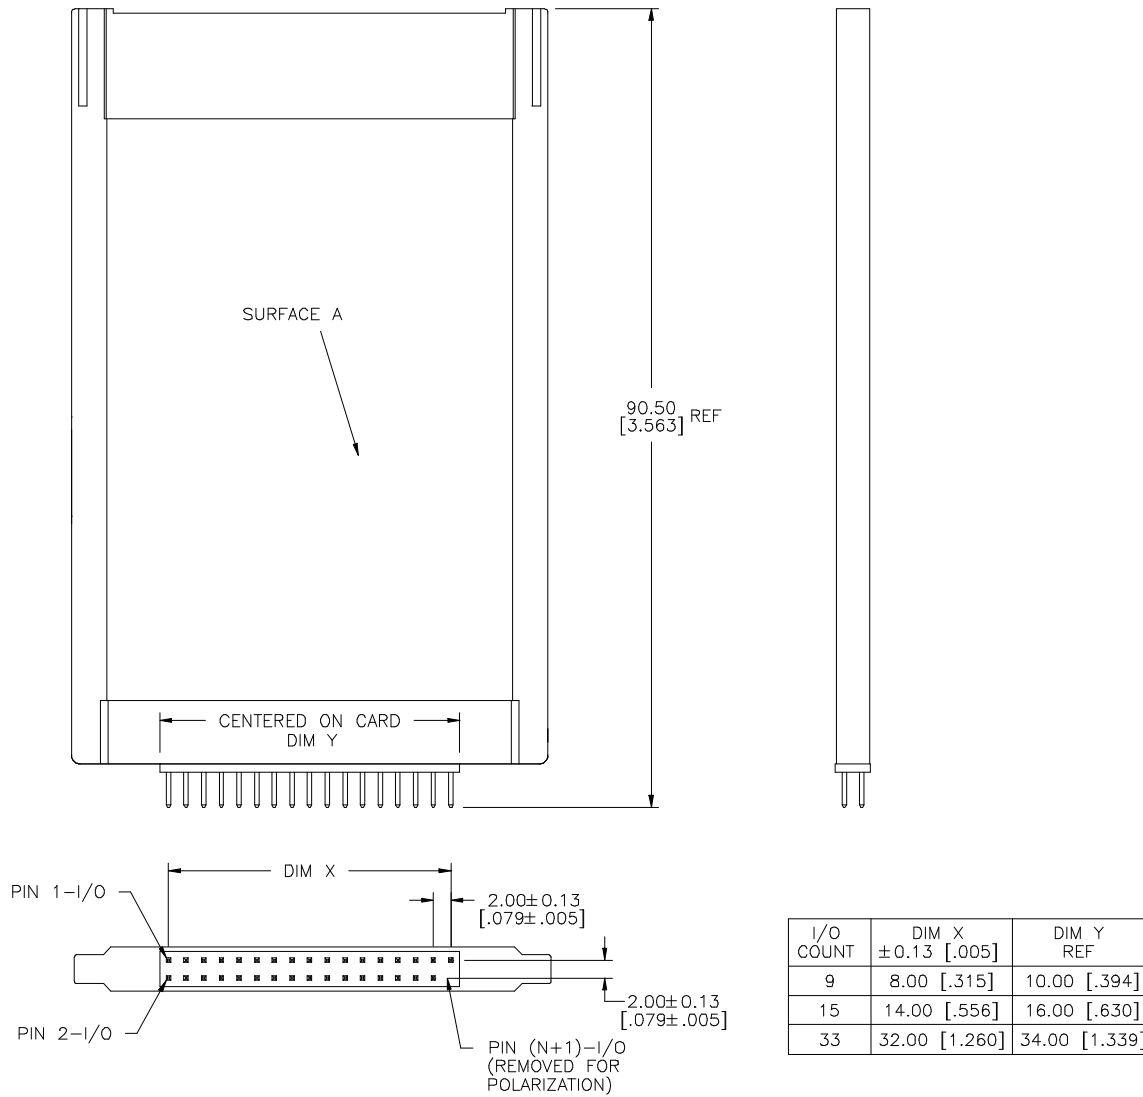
Small PCI Card (Surface A) With 2 mm I/O
